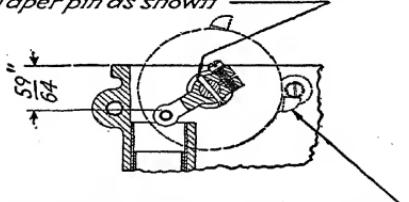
How the inside mixture-control lever is pinned to the shaft.
